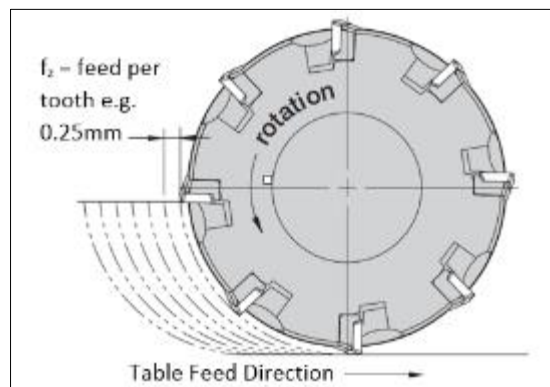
Top view of an example of a face milling cutter body with $z = 8$ and $f_z = 0.25$
